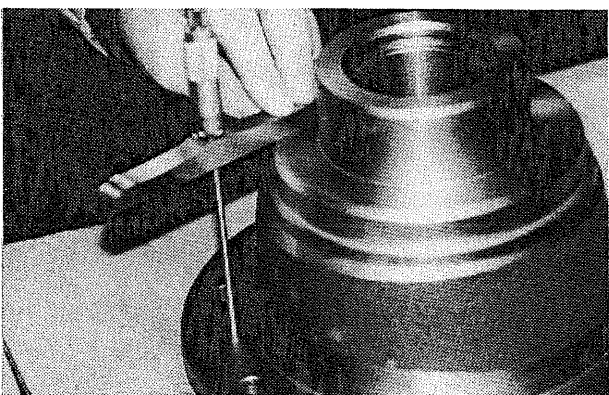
Drum & Freespool Assembly (4 of 7)
